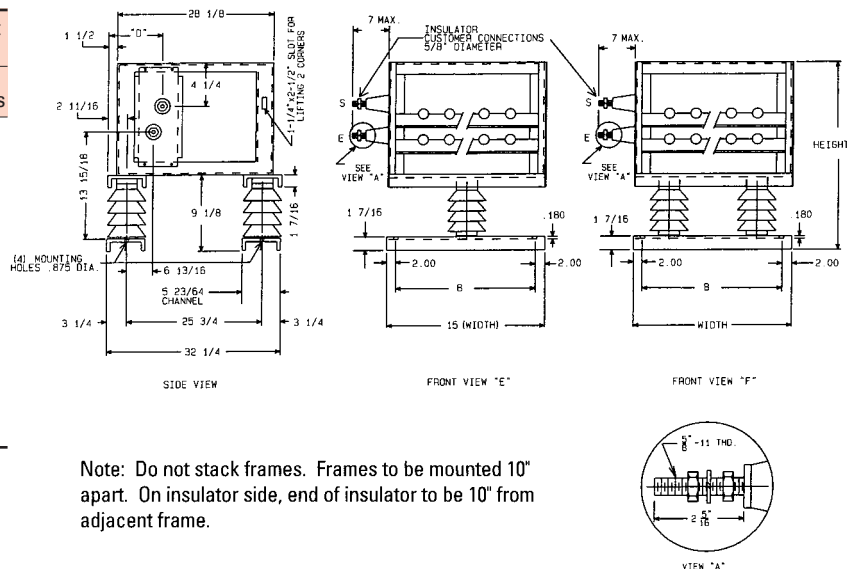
Dimensions and weights of DS300B 600-volt (maximum) resistors (open or with bolt-on covers)
